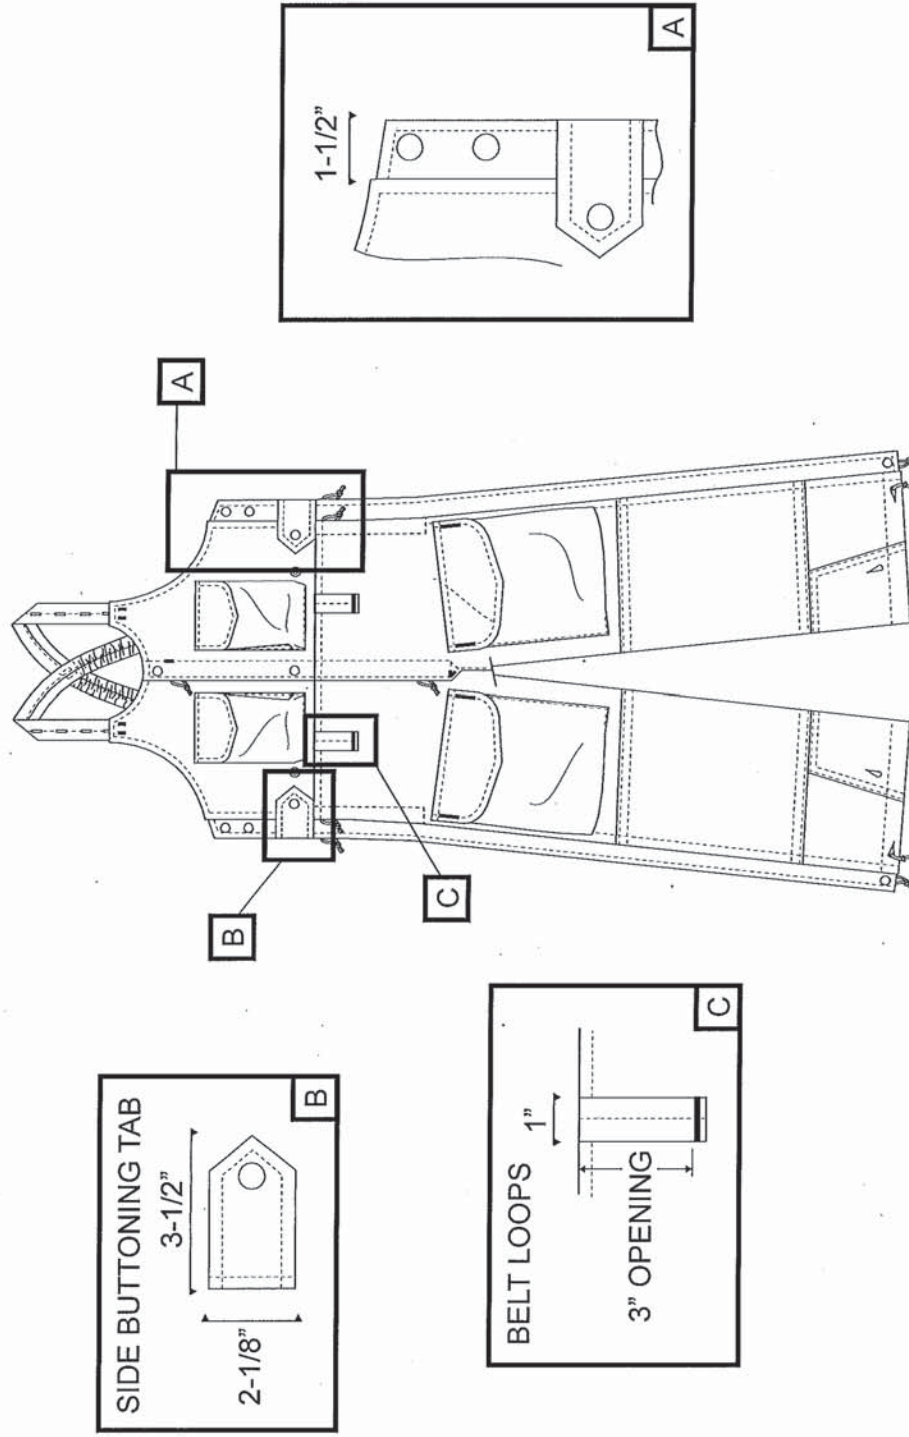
TOP SIDE OPENING AND INSIDE RATION POCKETS
